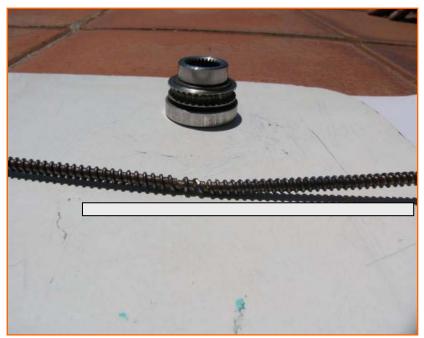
A view of the gear inside the steering control box, showing the damaged Control cable (Stretch & Kink) next to it.
